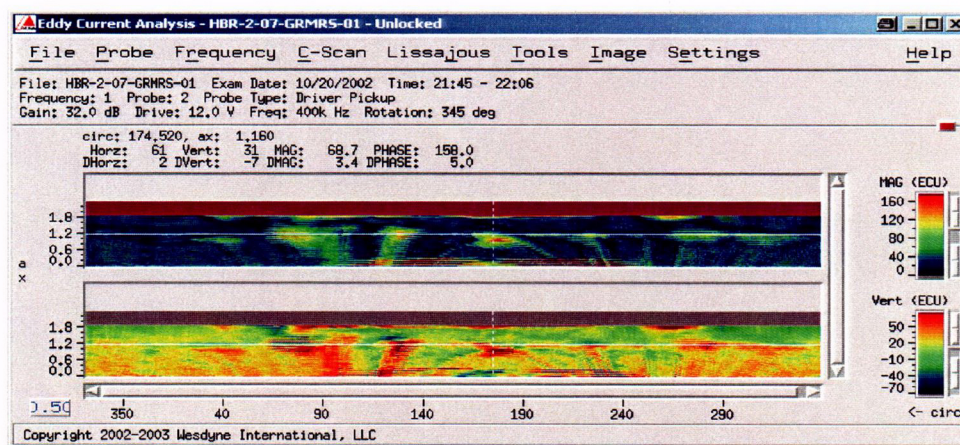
H.B. Robinson Penetration No.7 J-weld Examination Coverage on Cladded Surface
